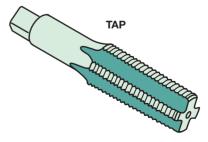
A typical bottoming tap used to create threads in holes that are not open, but stop in a casting, such as an engine block.
